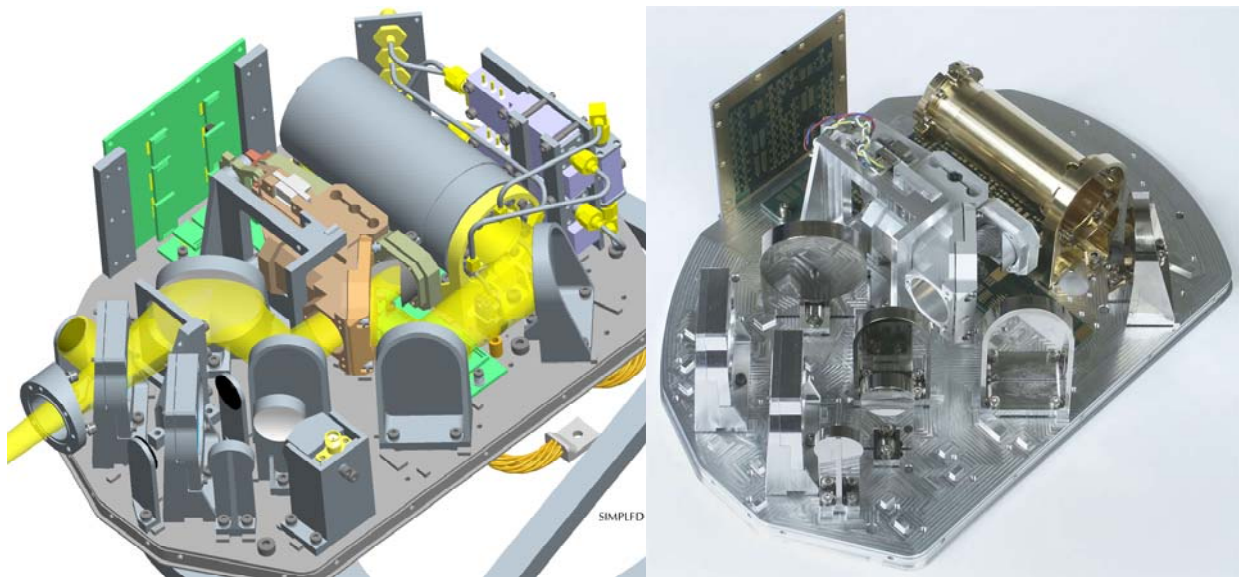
Design drawing of the TELIS-SIR cold plate and actual picture of it during the assembly procedure.
